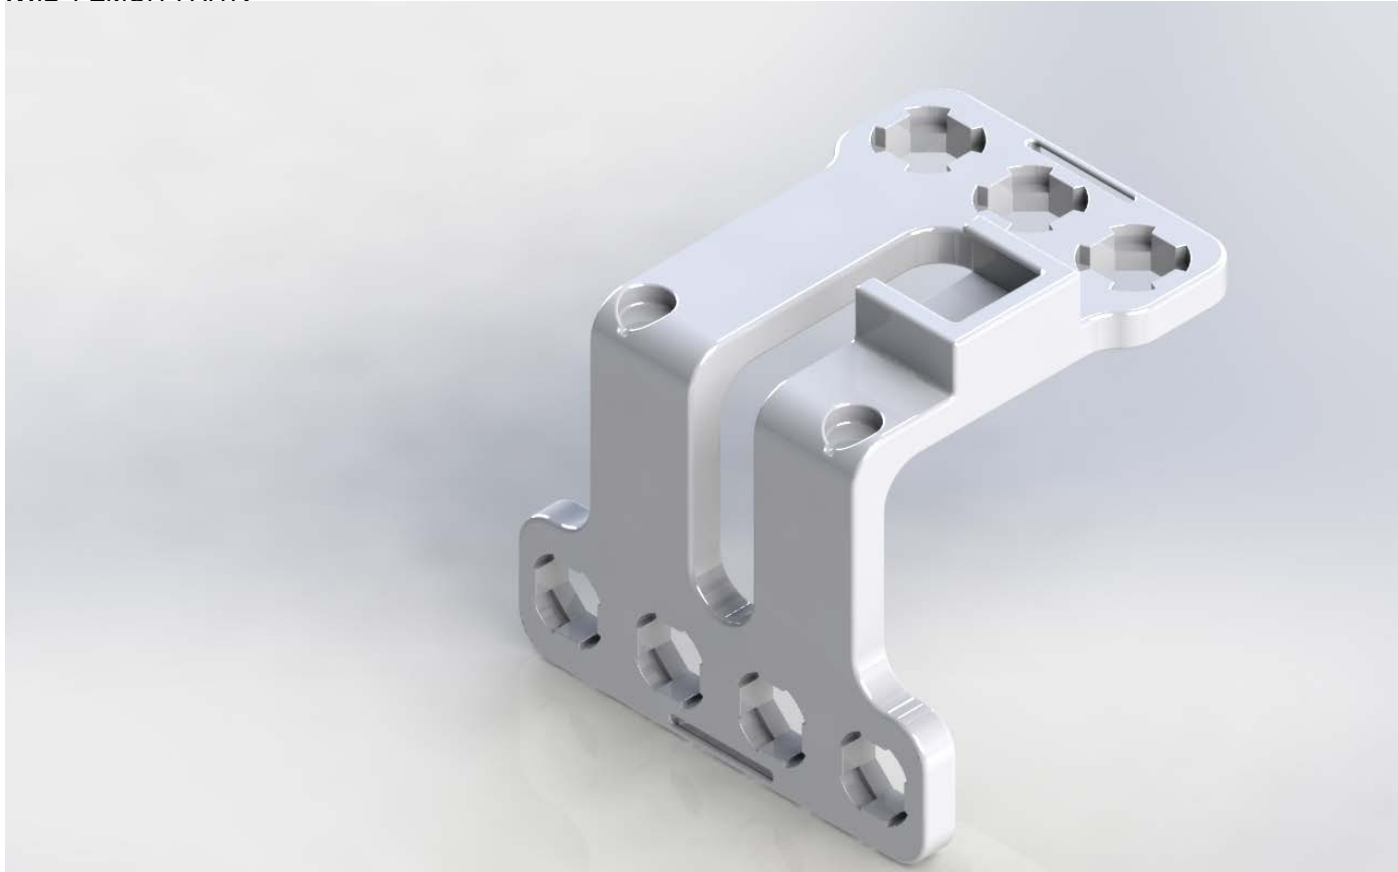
Exploded view of the improved location testing holder      Figure 4: isometric view of the complete location holder
